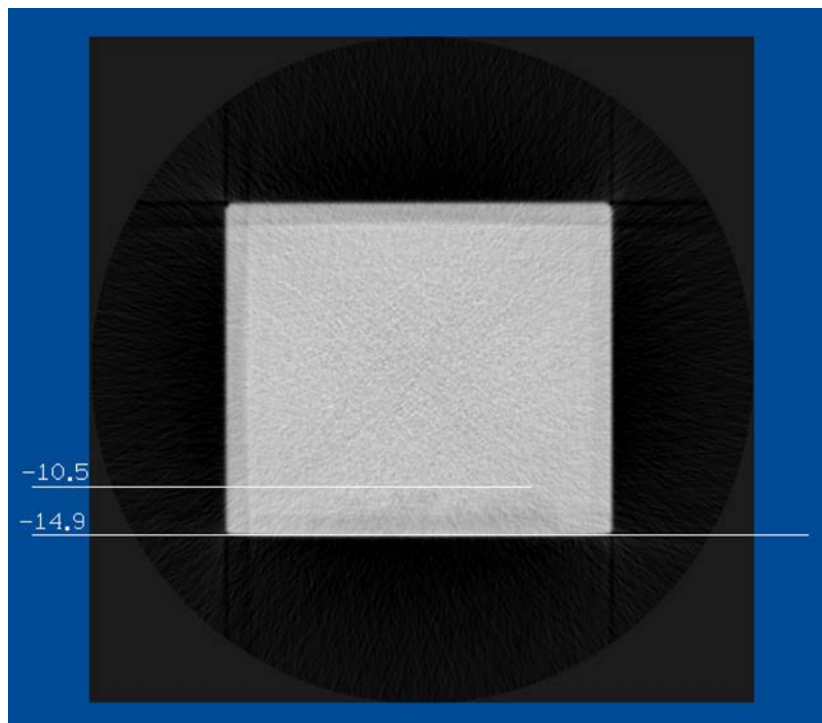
CT-slice #06 (z=107.40 mm) of test block P30 (N 220 AD U 7), crack depth: 17.8 mm (+/- 2 pixel = 0.24 mm), 58.7% of weld thickness
